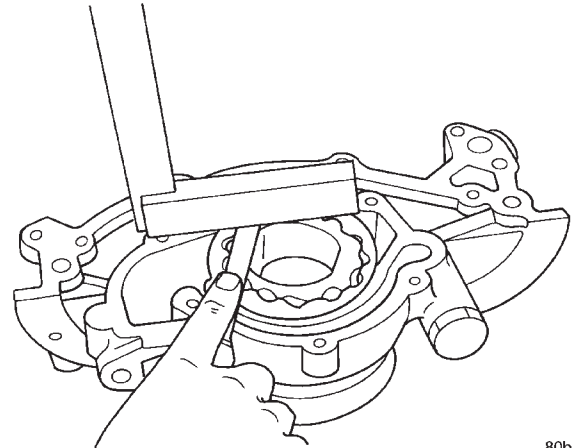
Measuring Clearance Between Outer Rotor and Case
